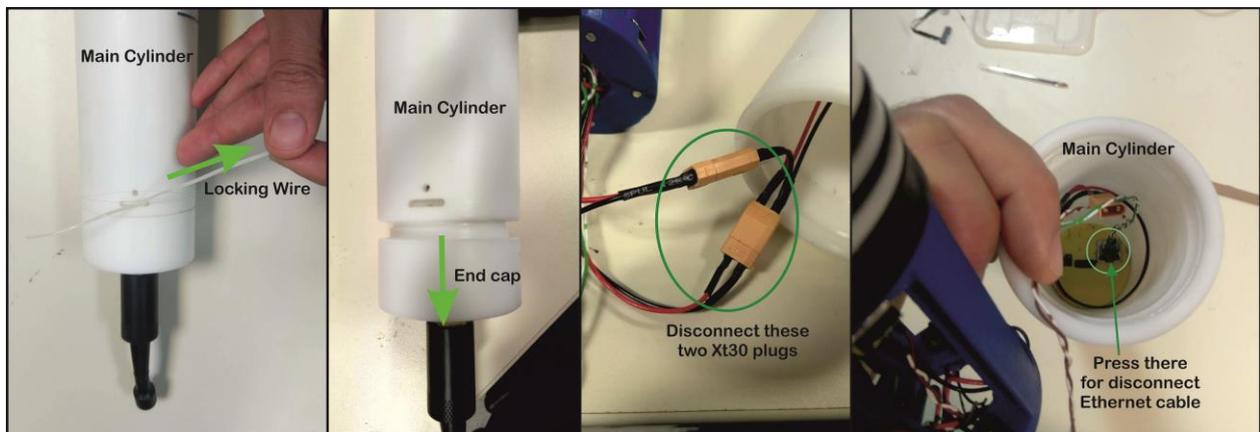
Removing locking wire, end cap, XT30 connectors and Ethernet connector from main cylinder
